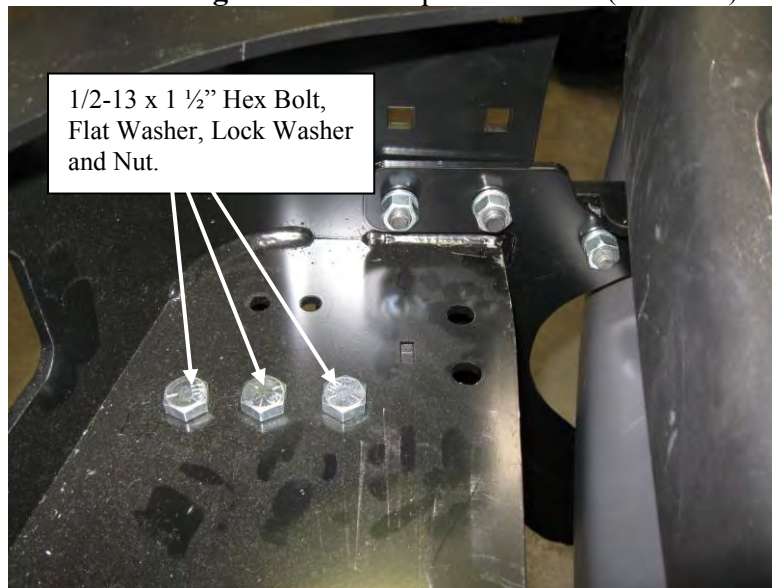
Large Frame Carrier: Carriage Hex Bolt Positions.
